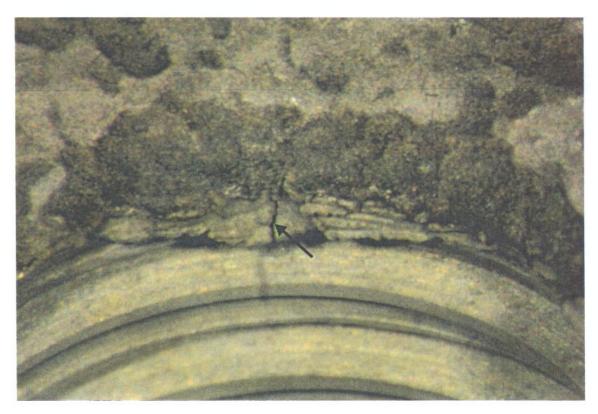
45° view on the inner end of the grease nipple hole showing a radial crack in the material grossly deformed by shot peening x36
